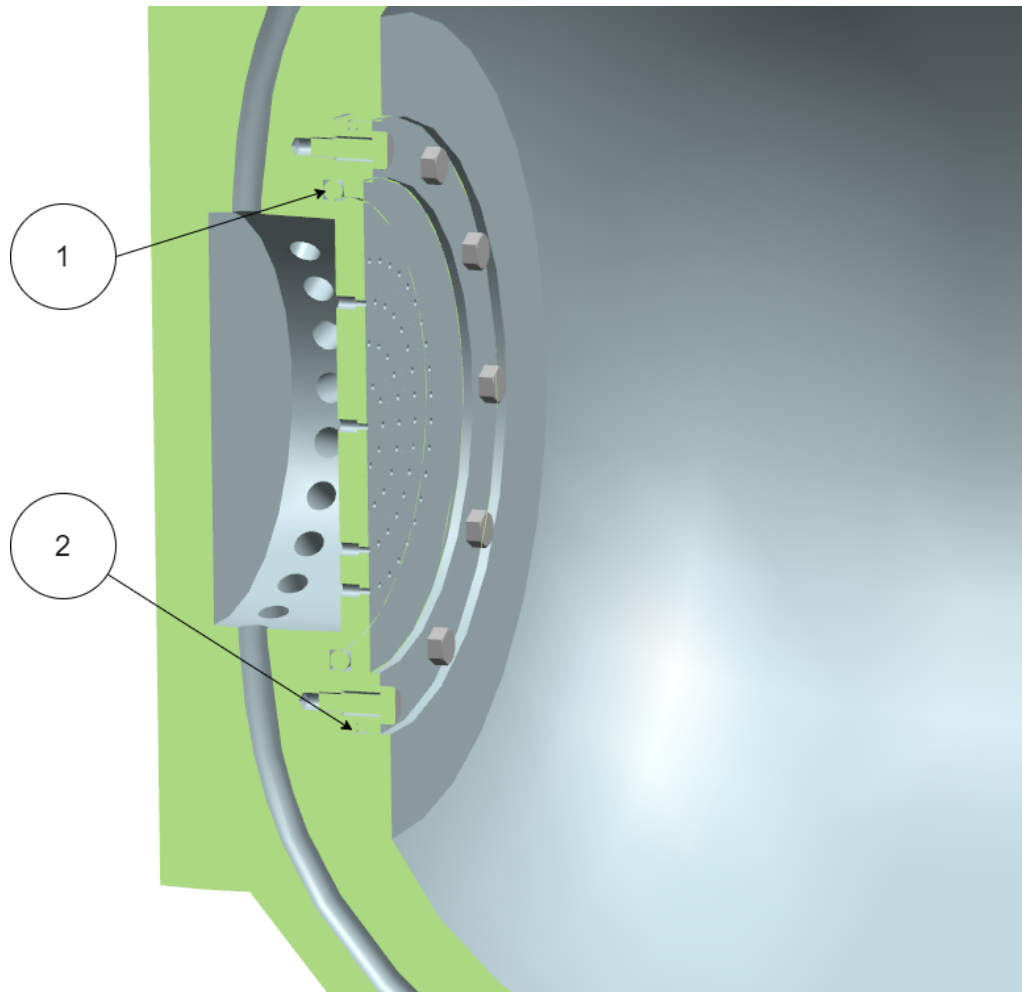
Section of the mounted injection plate in the head casing, 1 - primary seal, 2 - secondary seal
